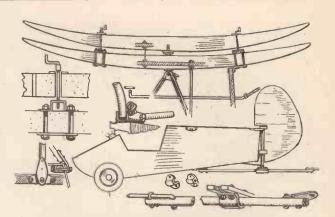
The head of the speed indicator is soldered in place as shown.
